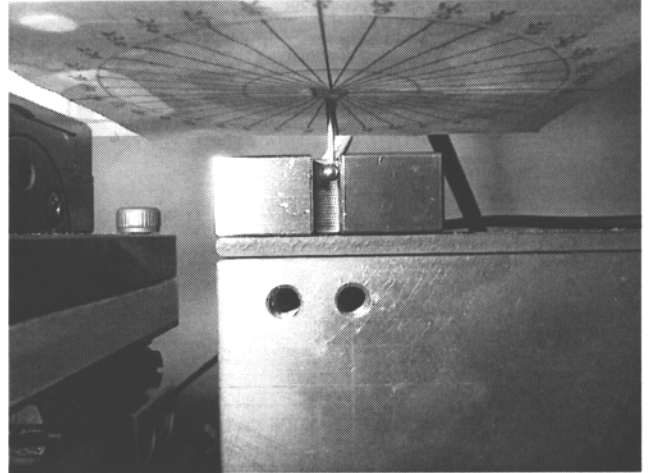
Groove gauge for evaluating accuracy of pneumatic ball probe
